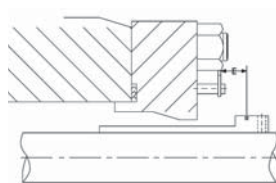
Differential expansion between the shaft and pump casing caused by heating of the pump, E = 0.125".
